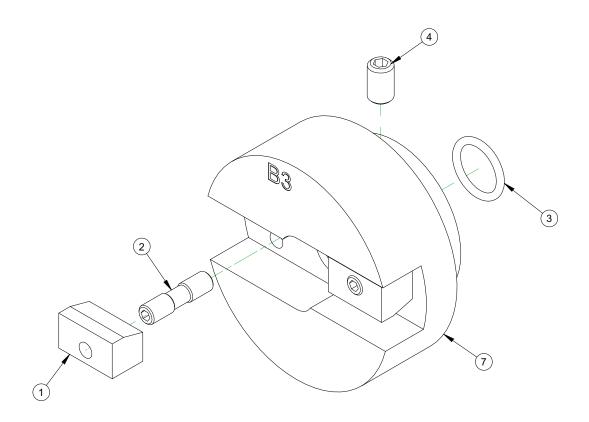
BG38 TOOL HOLDER ASSEMBLY (P/N 103081)
